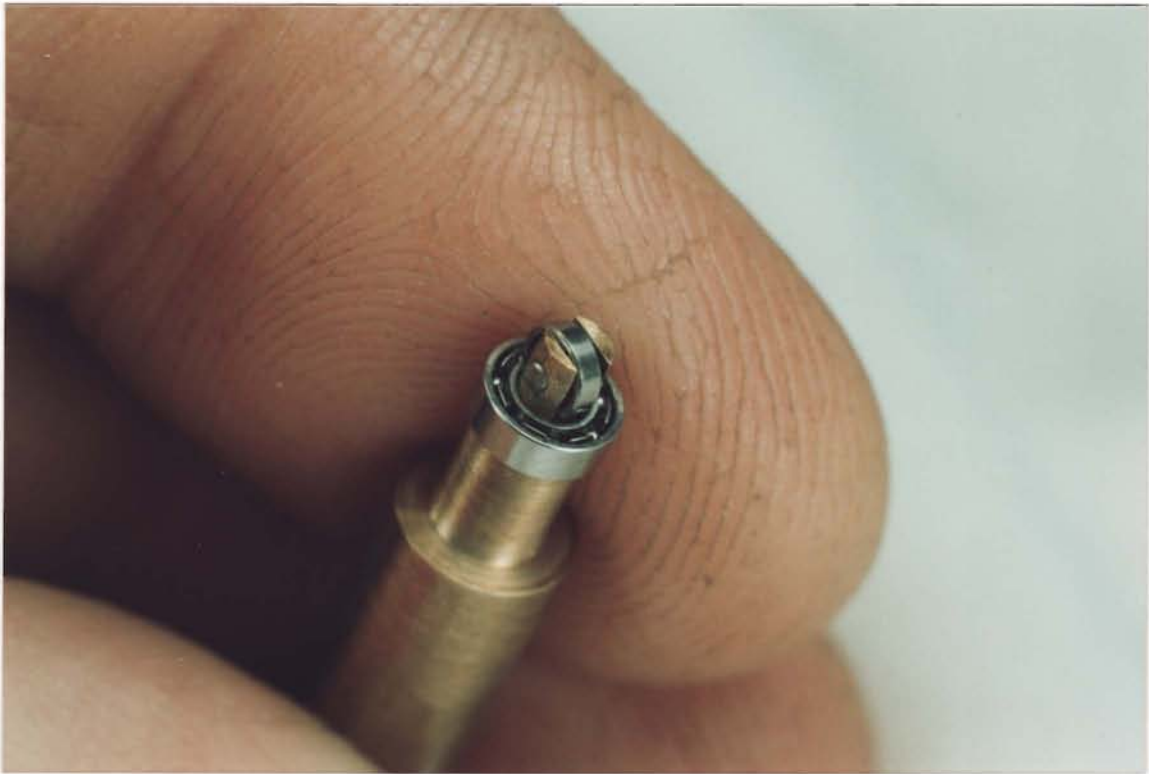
Alternative bearing arrangement for addressing binding under lateral loads involved mounting the main bearing on a post and locating a smaller lateral support bearing in the center of the post and oriented perpendicularly to the main bearing axis. (Photo. GC060793R1-19)
